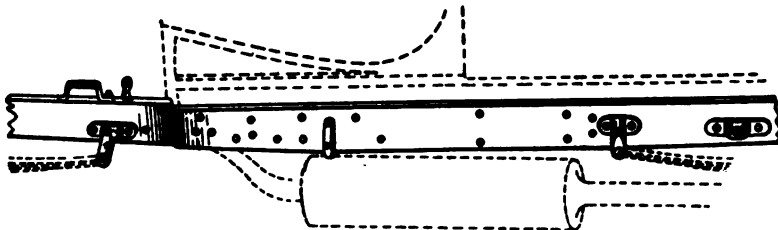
Side Bar of Frame, Showing Excessive Riveting.
